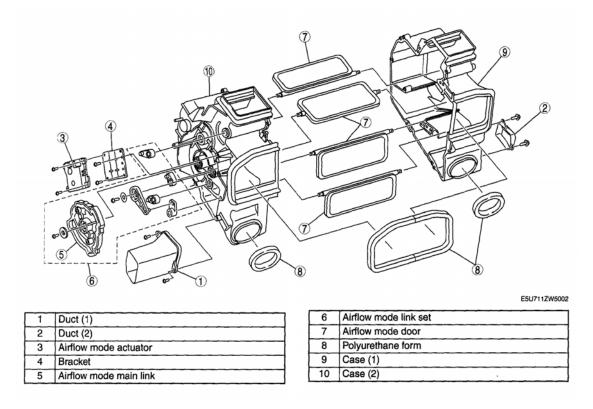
Exploded View Of Air Distribution Unit Components Courtesy of MAZDA MOTORS CORP.
